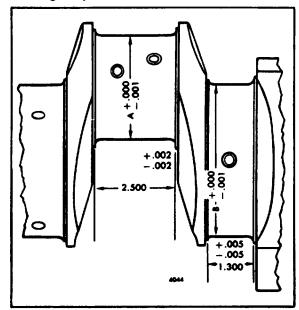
Dimensions of Crankshaft Journals - V-Type Engine
